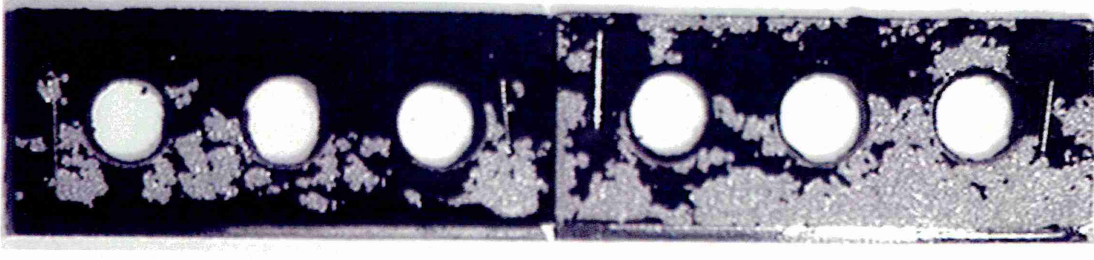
Alumina grit blast fracture surface after environmental exposure
